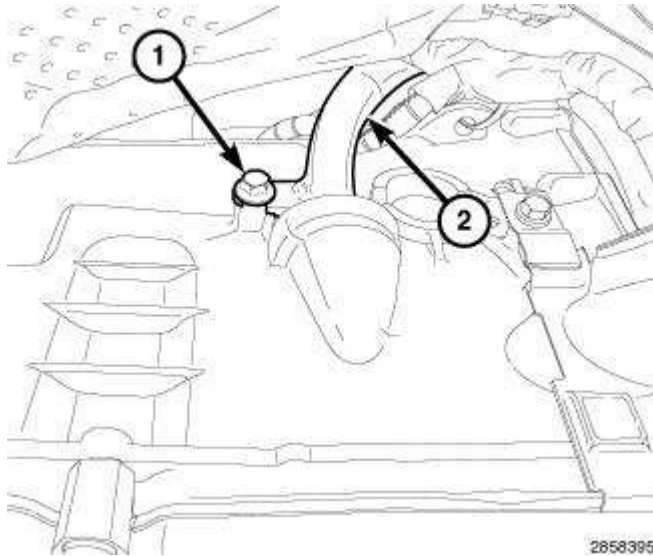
Transmission Fluid Level Indicator Tube & Bolt
